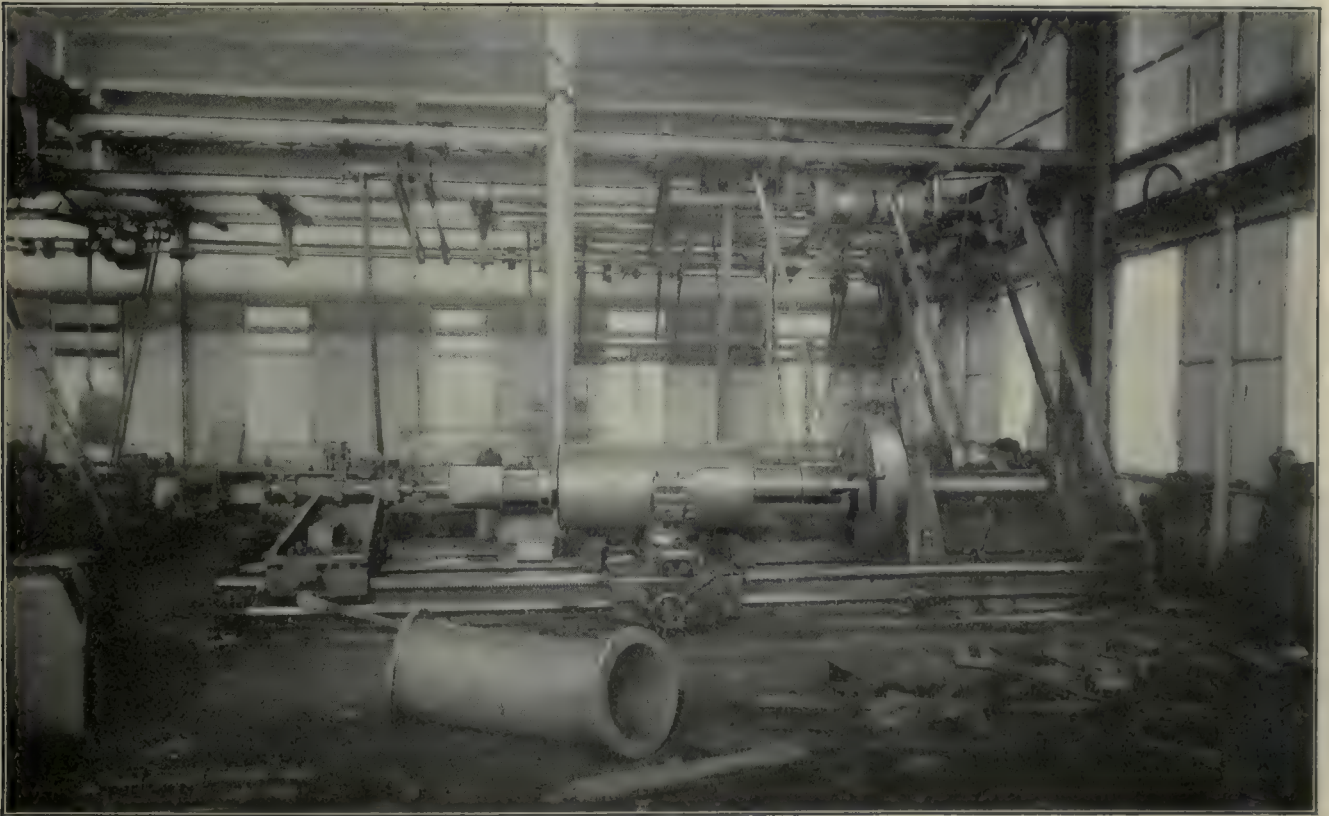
SUGAR-MILL ROLL SWUNG IN BIG LATHE
